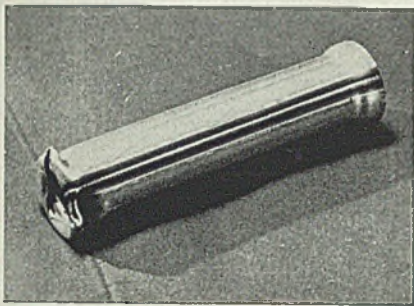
(Left)—Welded tubing as produced. The slight welded reinforcement usually is removed with a cutting tool mounted a short distance from the welding flames. Weld withstood crushing at one end and diameter expansion at the other end without failure
